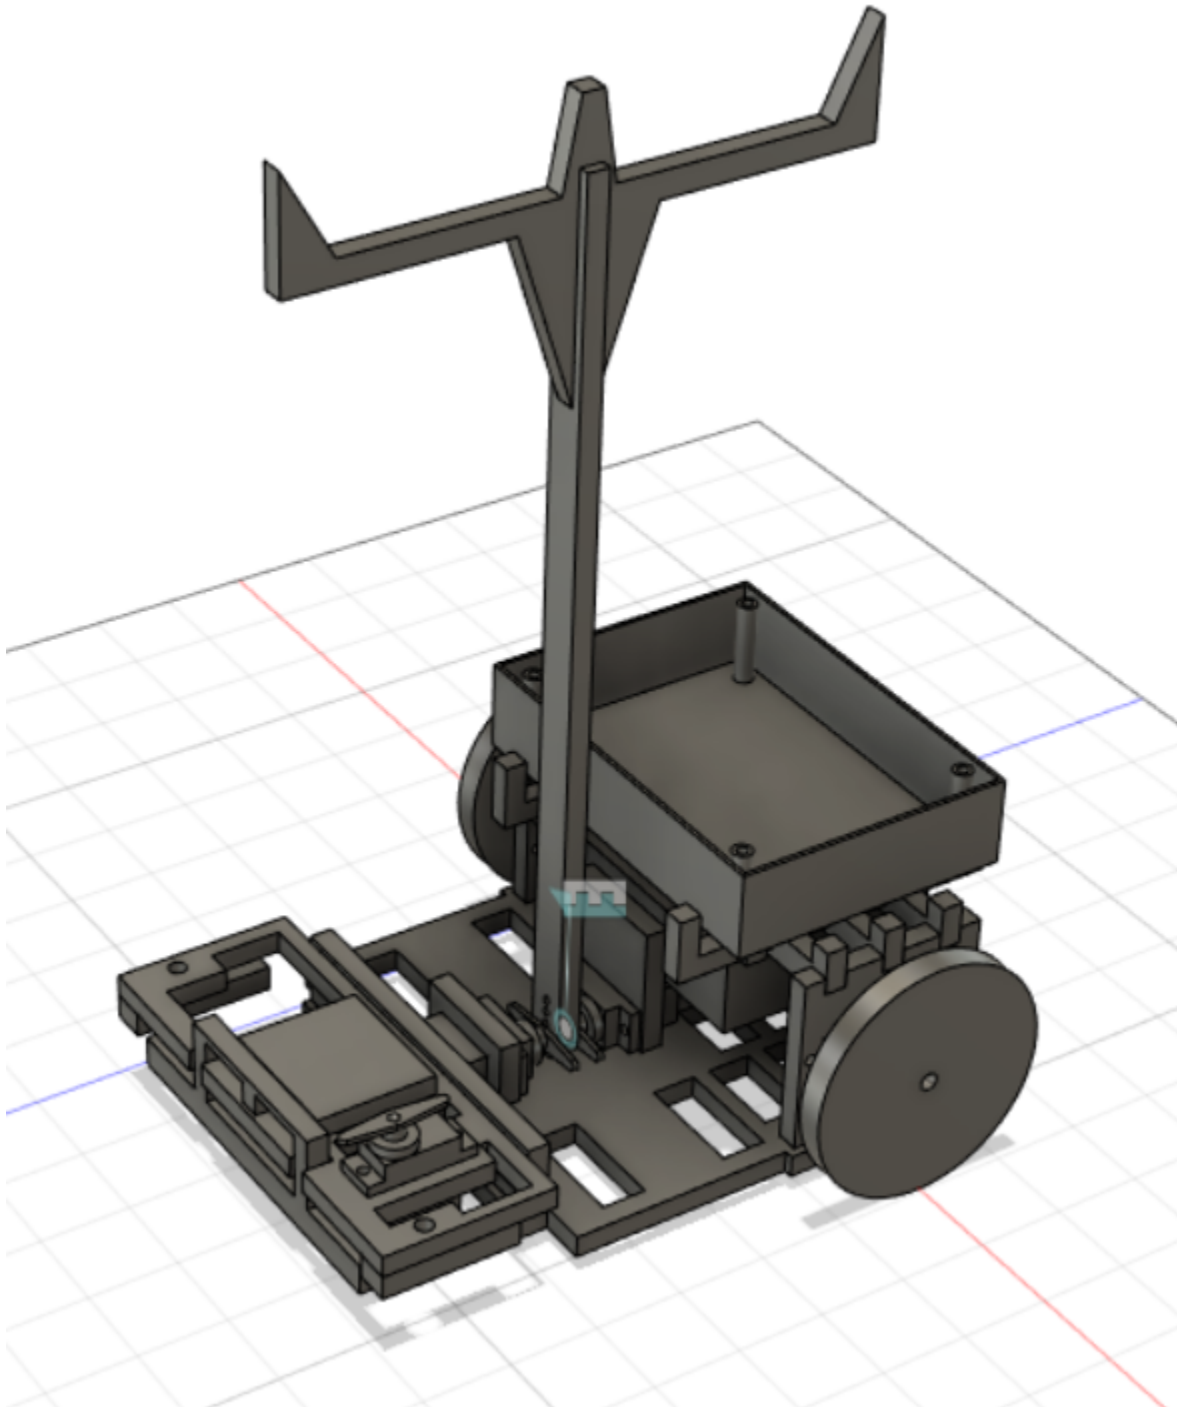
Full 3d model assembly of our robot on Fusion 360.
